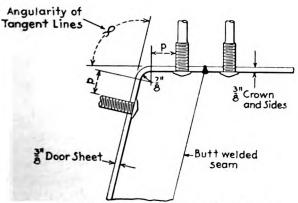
Door sheet applied to crown and side sheets by welding
